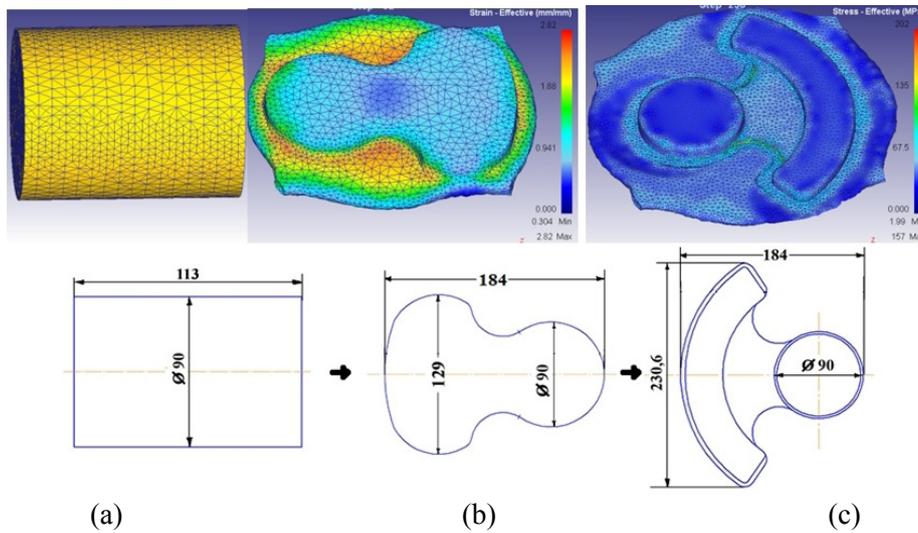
Forging technology without pre-profiling: a – workpiece; b – preliminary forging; c – finish-forging
